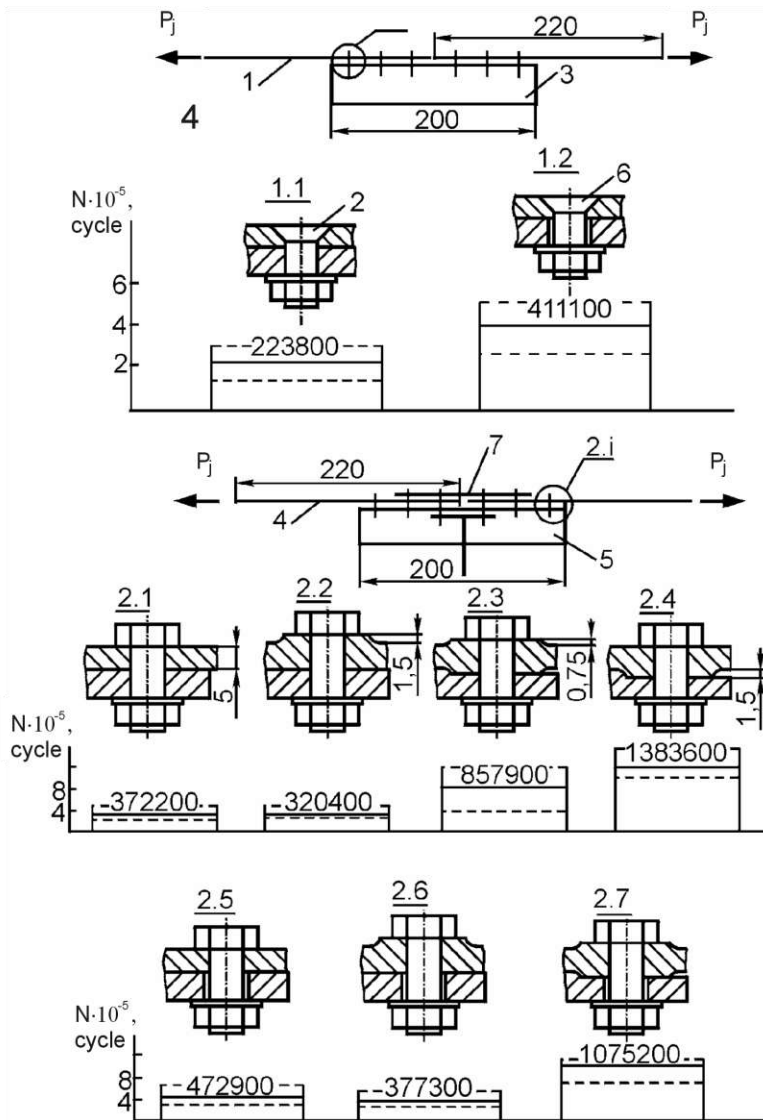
Specimens of joints with the rigid profile: 1 – plate made of the Д16АТл5 sheet; 2 – 5015-8-25 bolt; 3, 5 – the Д16Т-Пp315-7 profile; 4 – Д16Т plate; 6 – three-cone countersunk head bolt; 7 – strap
